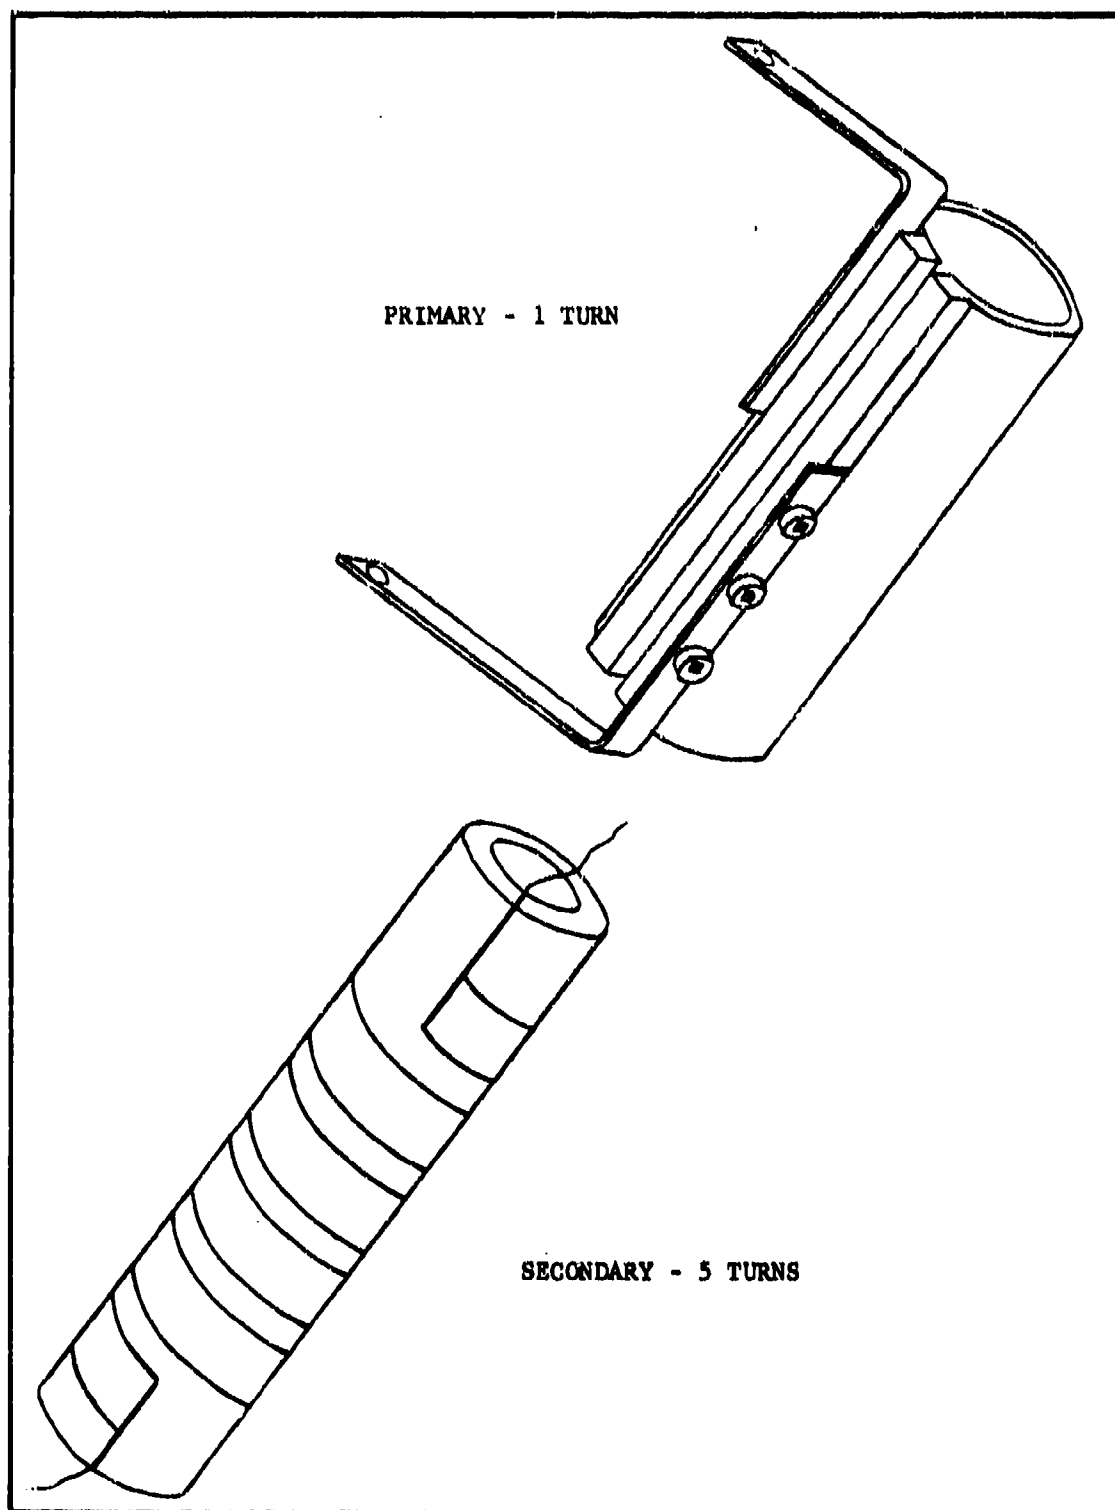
Exploded view of output transformer showing single-turn primary coil and closely coupled secondary
